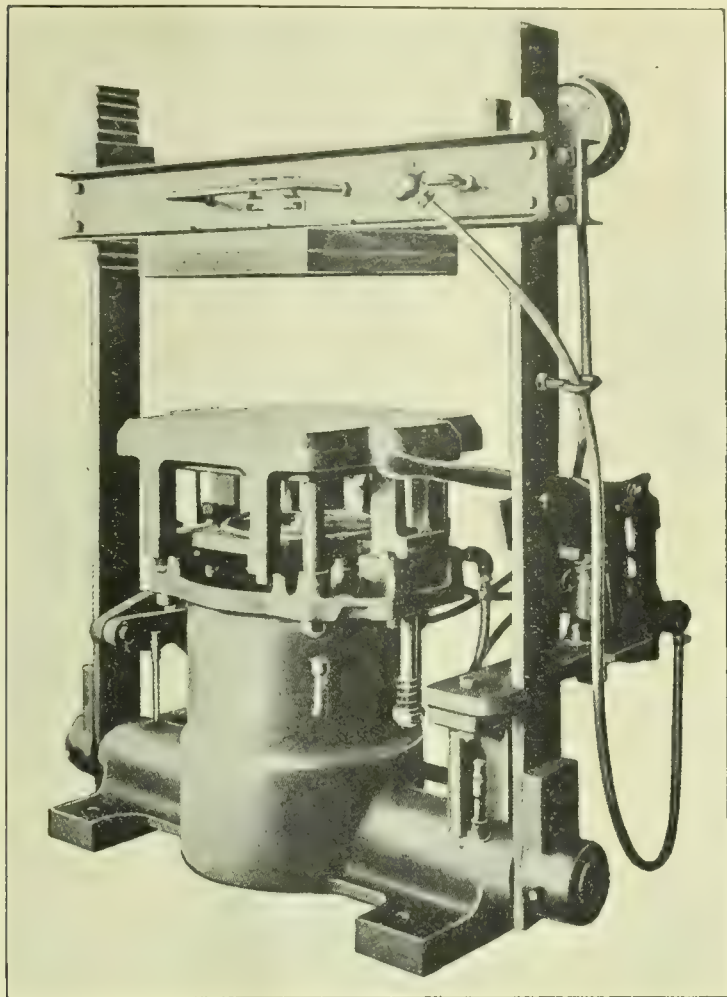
SMALL POWER SQUEEZING SPLIT-PATTERN MACHINE.
